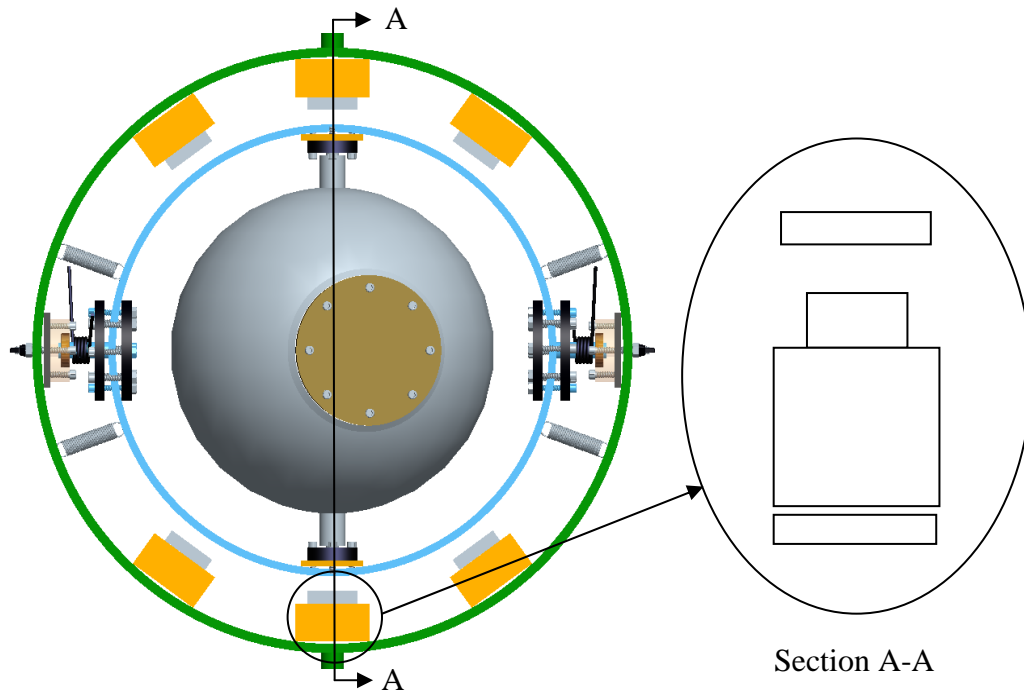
Sectional view of magnet and its mounting for magnetic analysis
